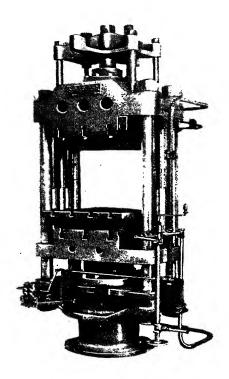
Modern semiautomatic press. Note arrangement for bolster mounting of mold, push-back cylinders between side rods of press, and independent double-acting ejector cylinder at top.
